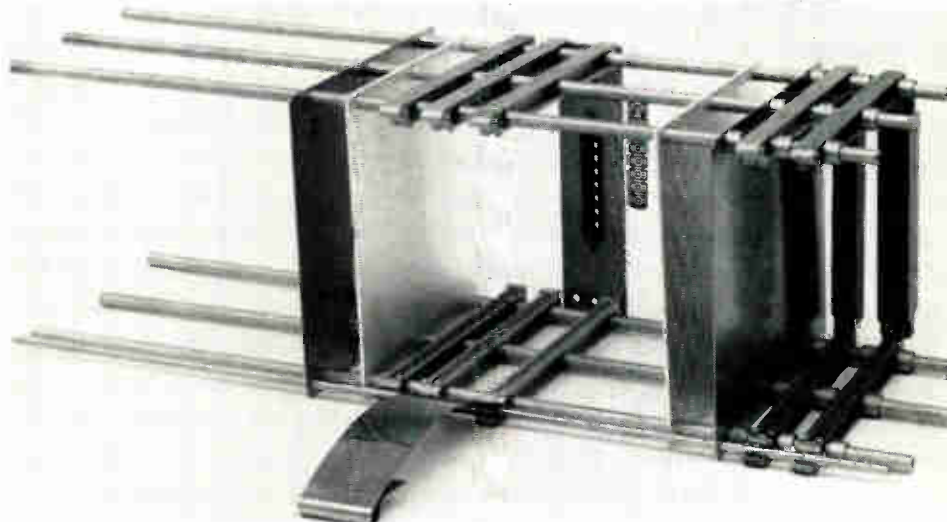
The exploded view of a module enclosure shows the important hardware parts.
